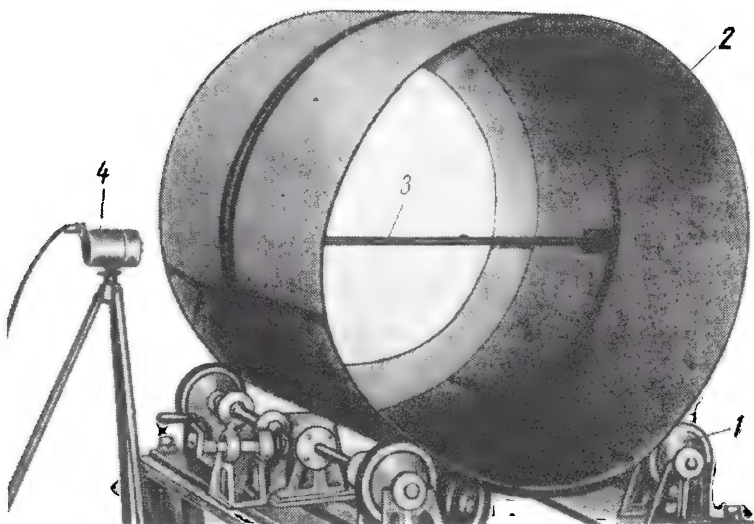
Examination of a weld section of a cylindrical welded article, placing the gamma-source outside the inspected object:
